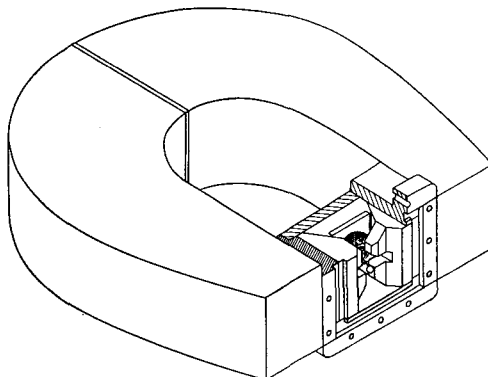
Large magnet with test chamber enclosing pole pieces and dumbbell assembly; windowed cover and gasket have been removed from test chamber.
